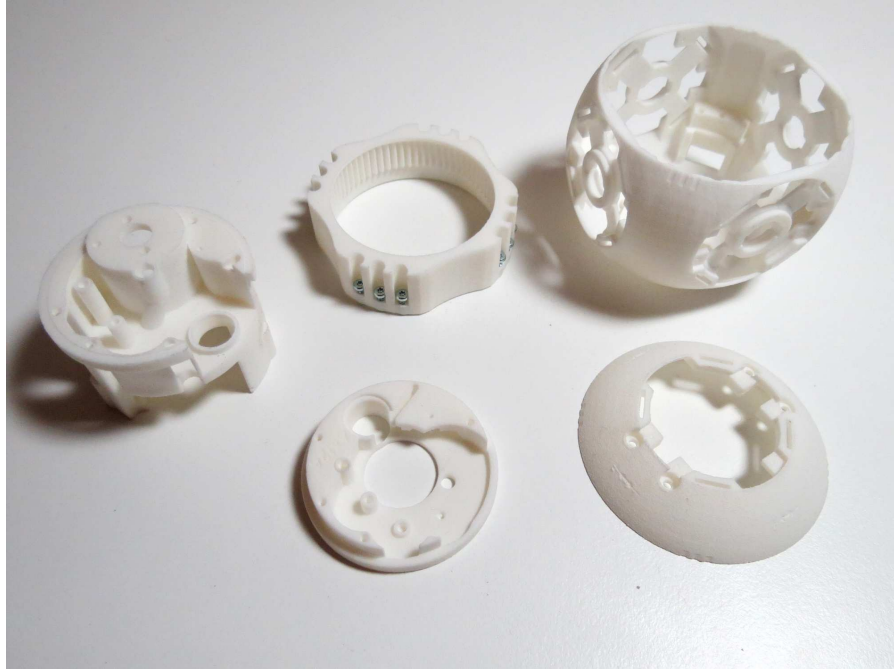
3D-printed components of the actuation module. Top left to bottom right: Gearbox enclosure body, internal gear, module shell body, gearbox enclosure cap, module shell cap.
